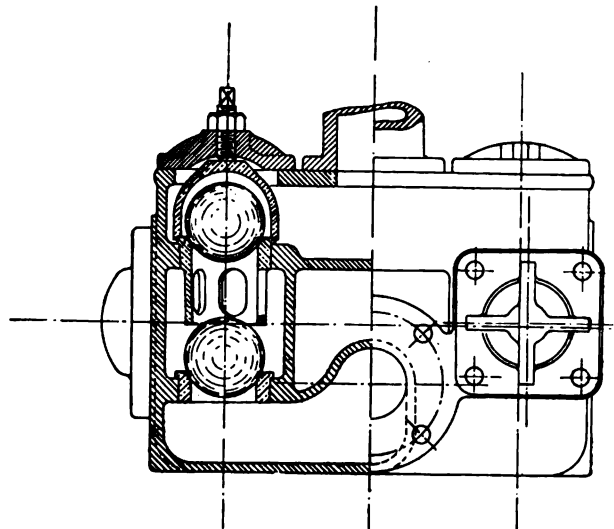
A.—Cornish Steam Pump, Ball Valves.
